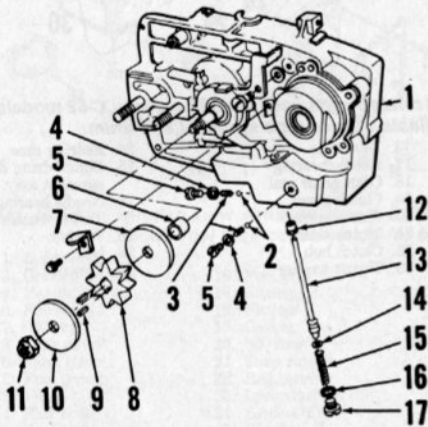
View showing chain drive sprocket and manual oiler pump components removed on models shown in Fig. HL64.
